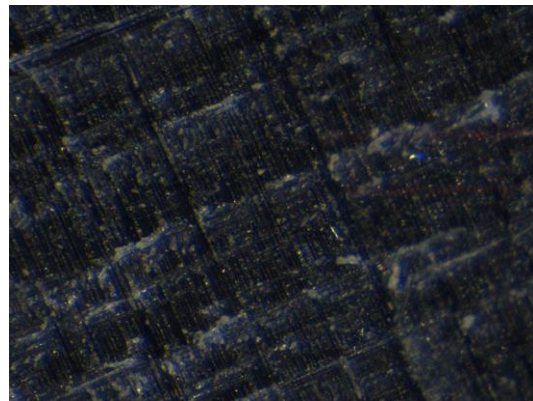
Close up of the slightly rough fracture surface of control specimen (shown in Figure 3.156) at 40x magnification.
